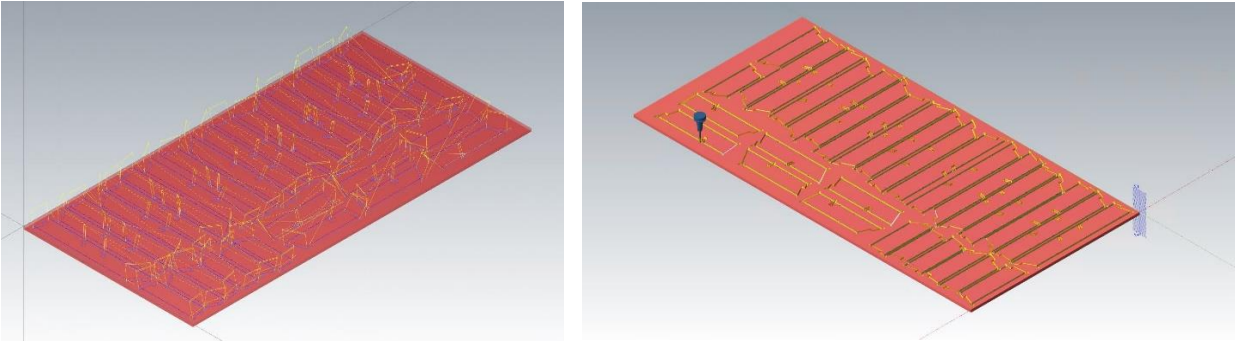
Full tool pathing for the 5-axis CNC cutting.
